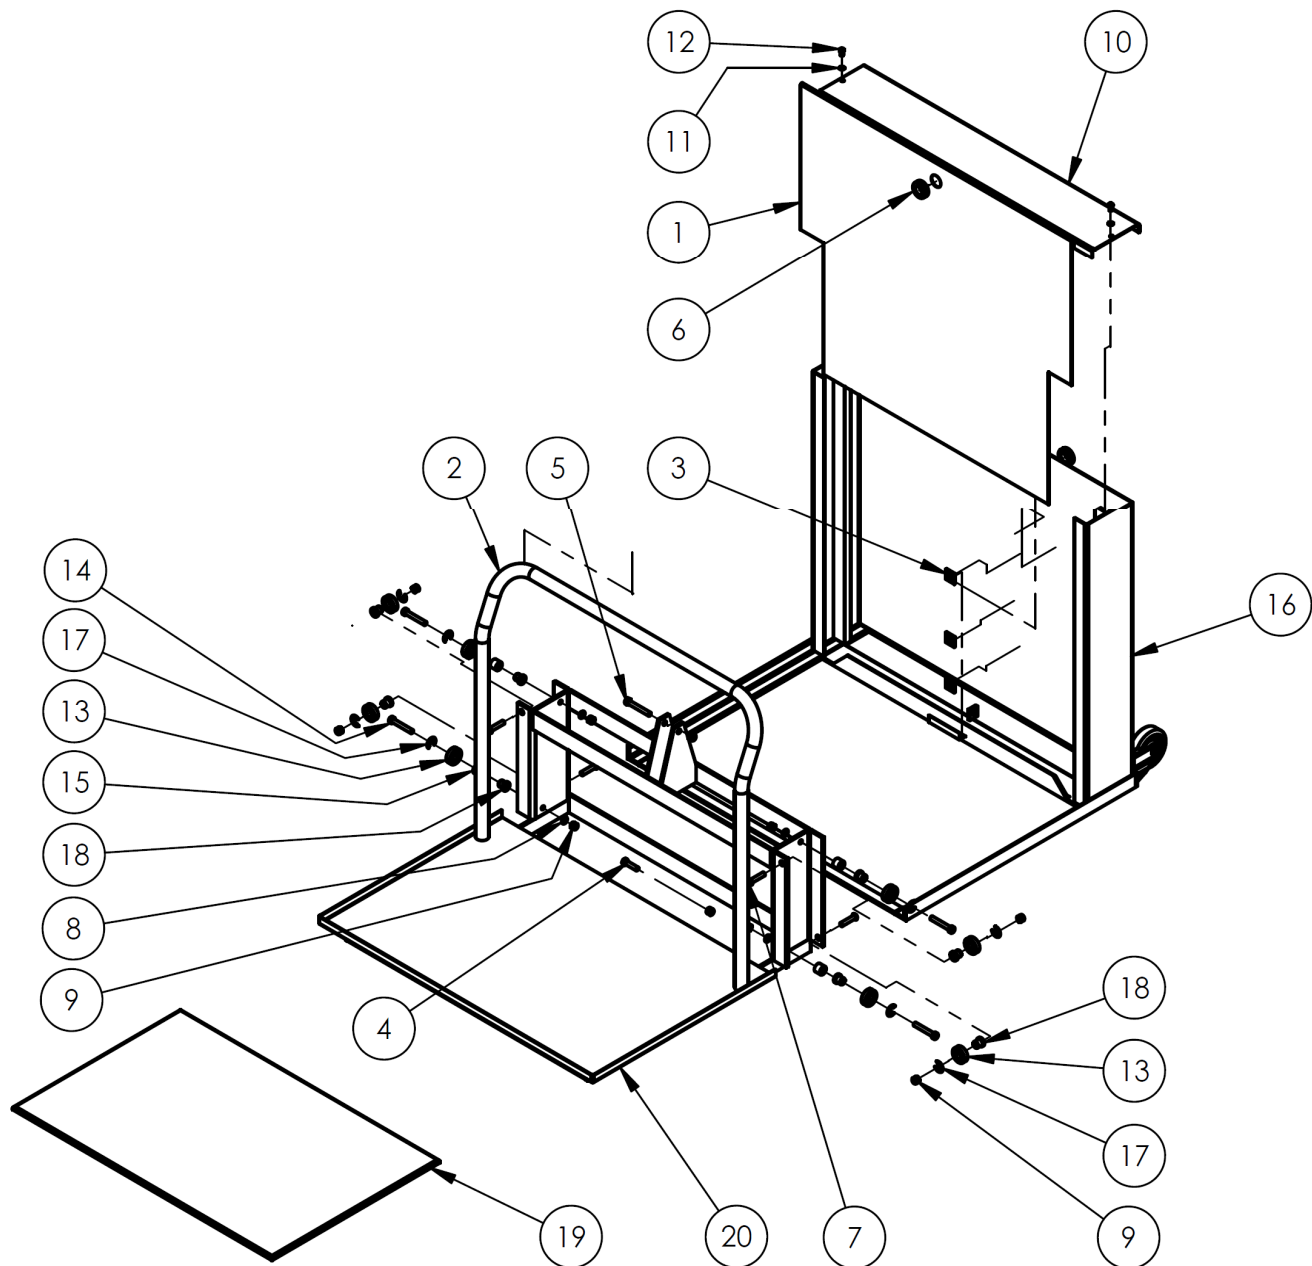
WP-400-AC Exploded Parts Diagram and Bill of Materials
